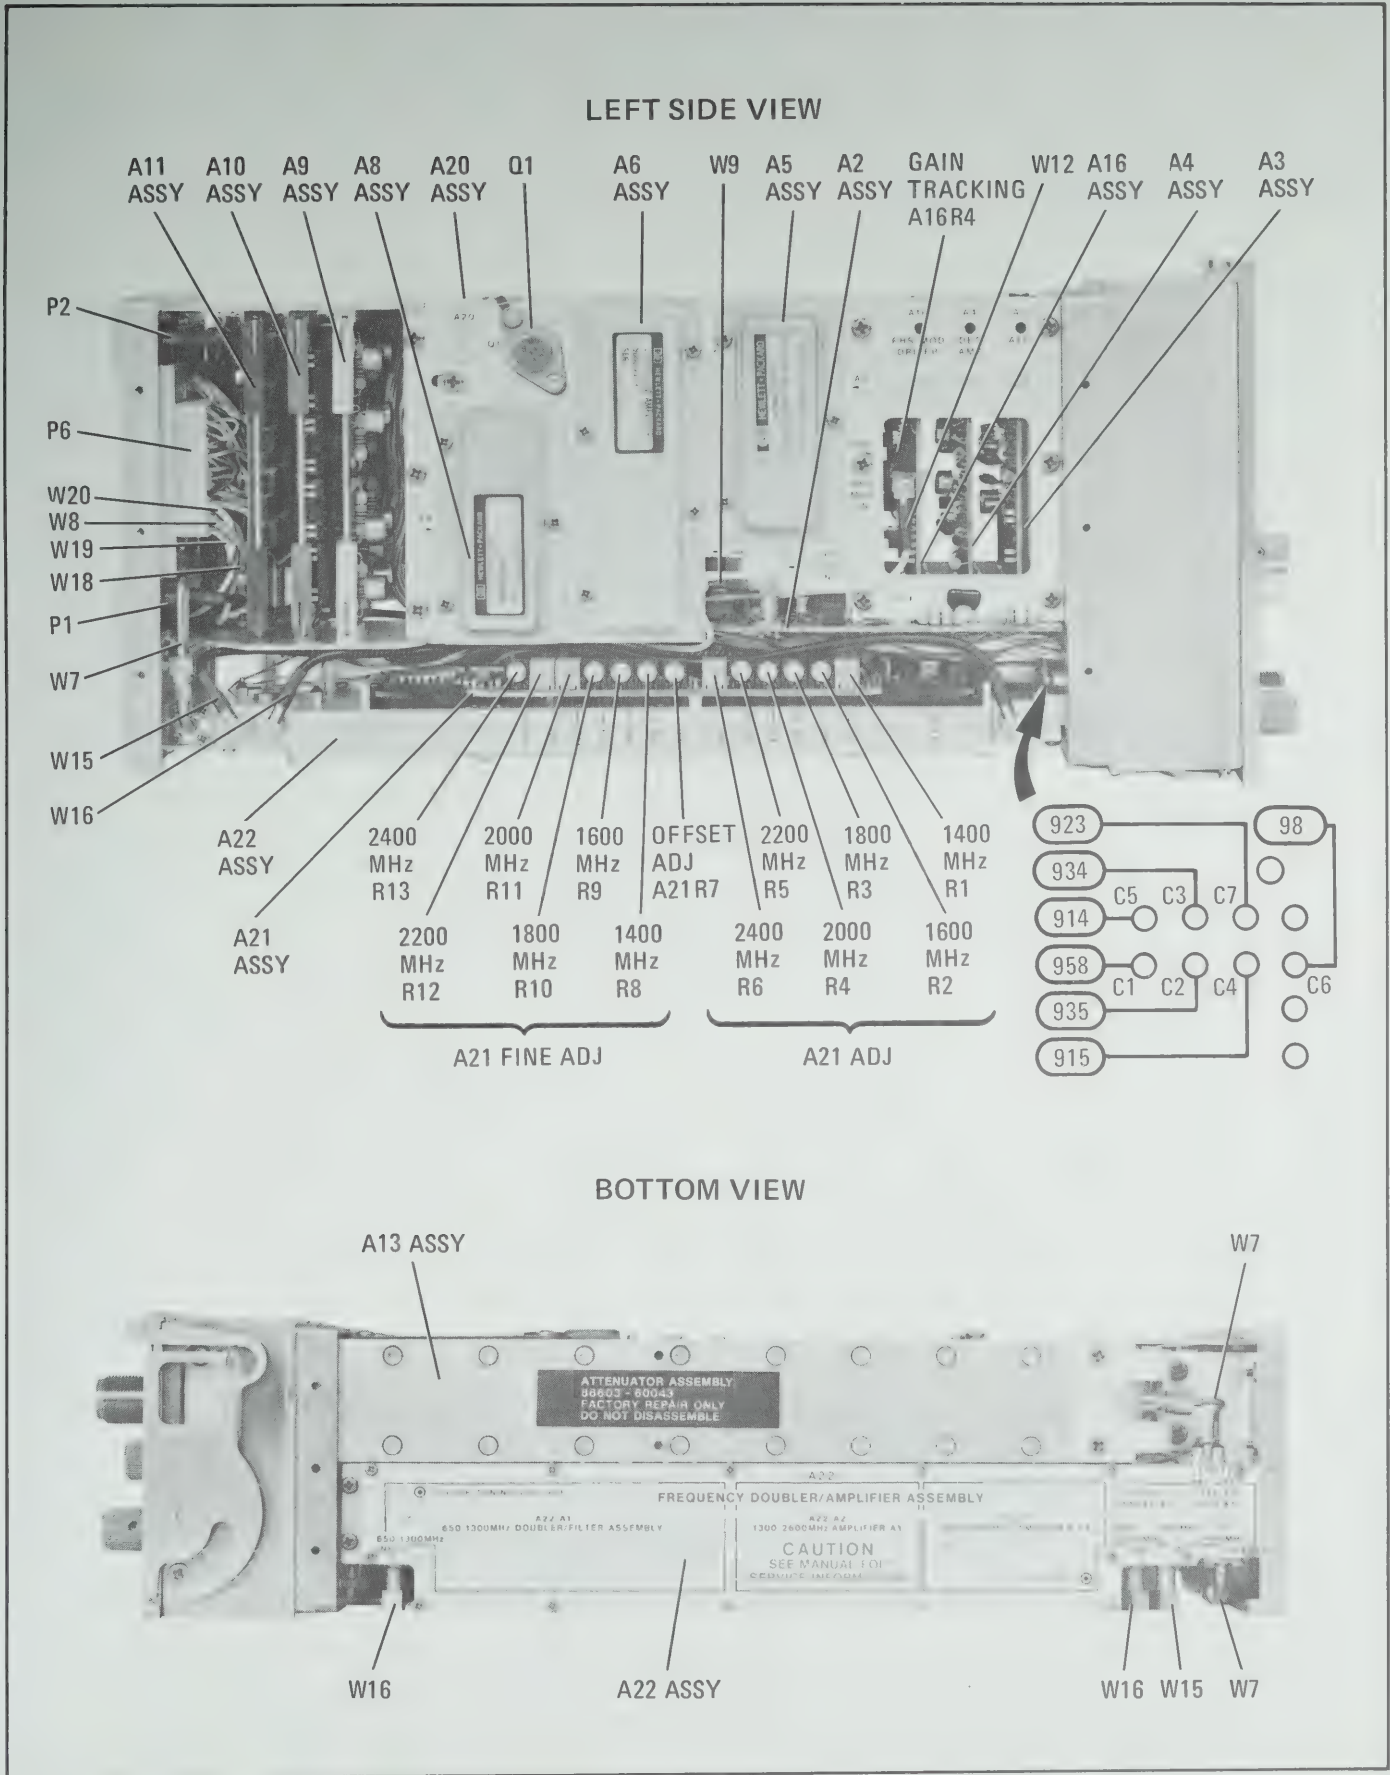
86603A (86602B) Test Points and Assemblies (2 of 2)
